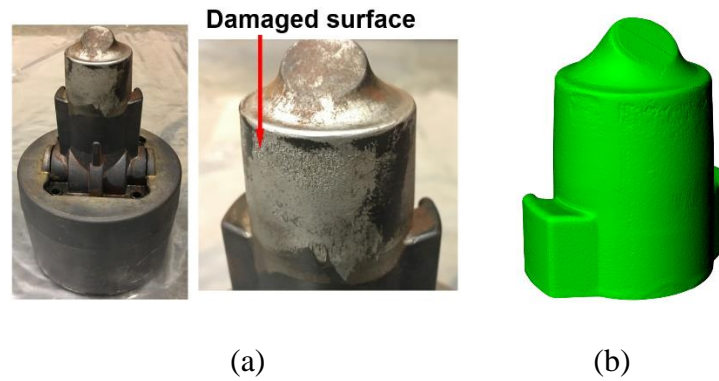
(a) A casting die with surface erosion, wear, and corrosion; (b) STL model of the damaged region of the casting die
